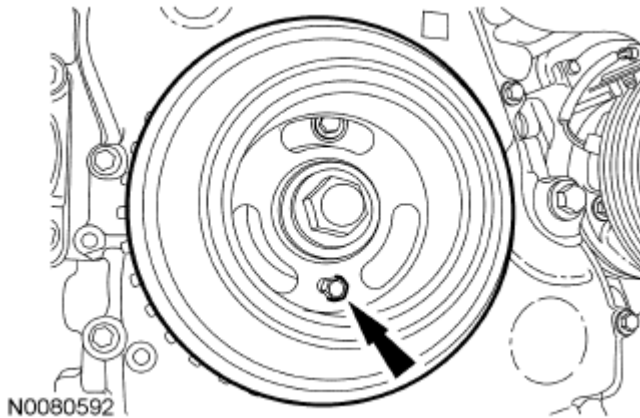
Locating Crankshaft Pulley Hole Bolt (6 mm x 18 mm)
